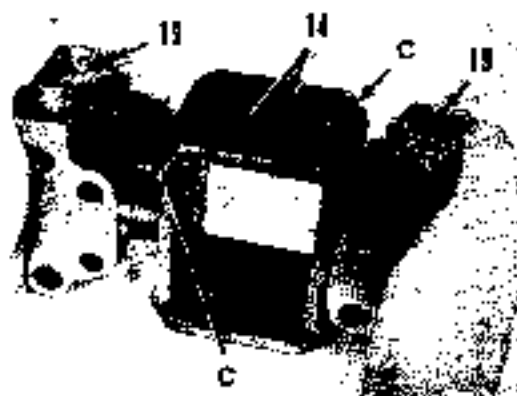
Chamfered corners (C) of piston yokes (14) must face away from each other.
